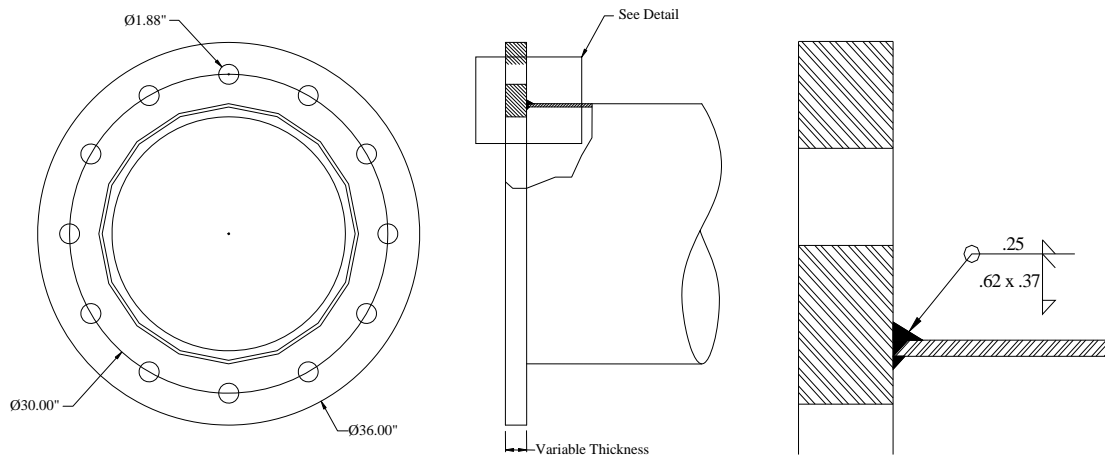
Full Penetration Groove-Welded Connection (Craig Rios, 2007)
